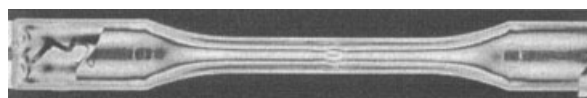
Image under polarized light of a PC specimen containing a weld line.
